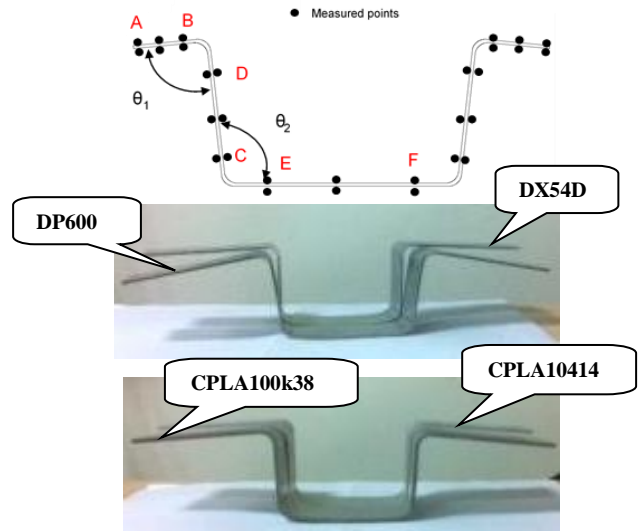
(a) Specimens showing Spring-back after the U-drawing process (b) measurement of Spring-back angles after the U-drawing process, showing approximate location of measurement points
